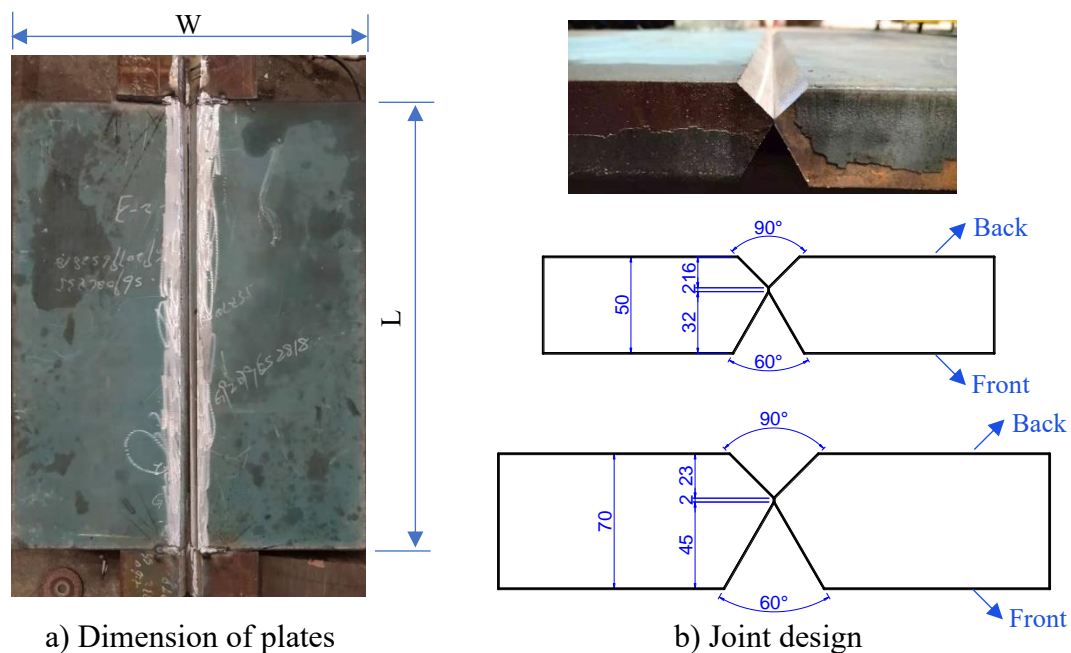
Butt-welded sections with an X-shaped groove
